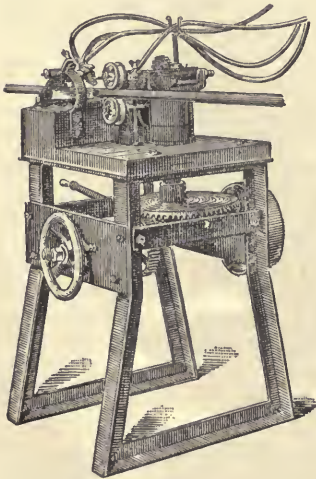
Machine for welding tubes, simple pattern, without pre-heating (Hager and Weidmann).
